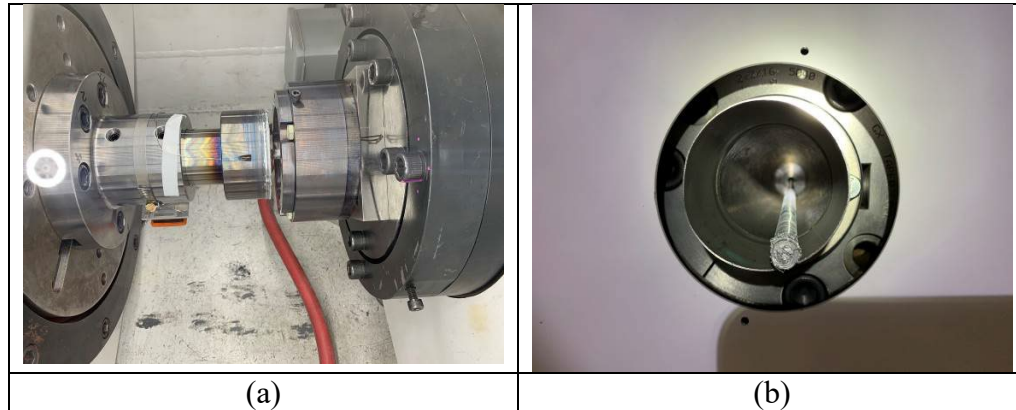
(a) extrusion die assembly in contact with the consolidated billet, (b) ShAPE extrudate coming out through the die orifice.
